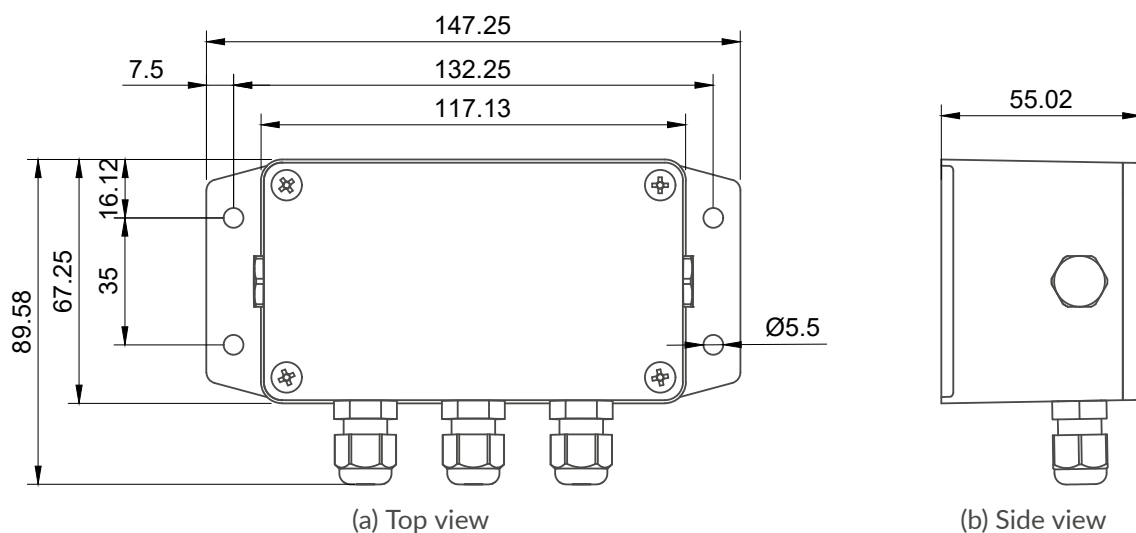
periSNOOP 4-20mA mechanical dimensions drawing.
